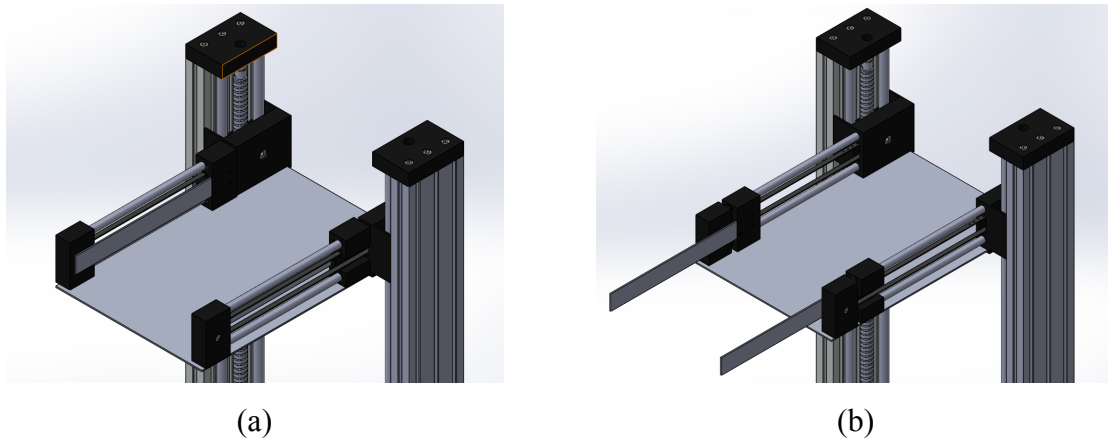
Complete assembly. Close-up of the bed platform with aluminum frames (a) Retracted position (b) Extended position
